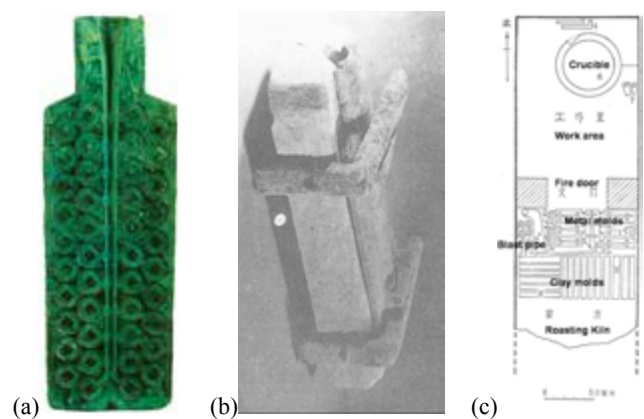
(a) Bronze-mold, (b) casting mold and (c) drawing of kiln, unearthed from Chengcheng, northern Shaanxi province in China in 1979. 118 - 113 B.C
